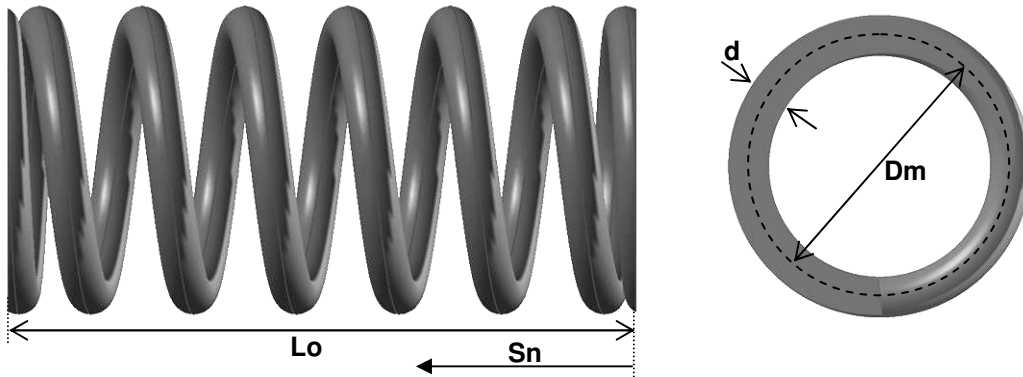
Tevema helical spring for the anti-roll mechanism
